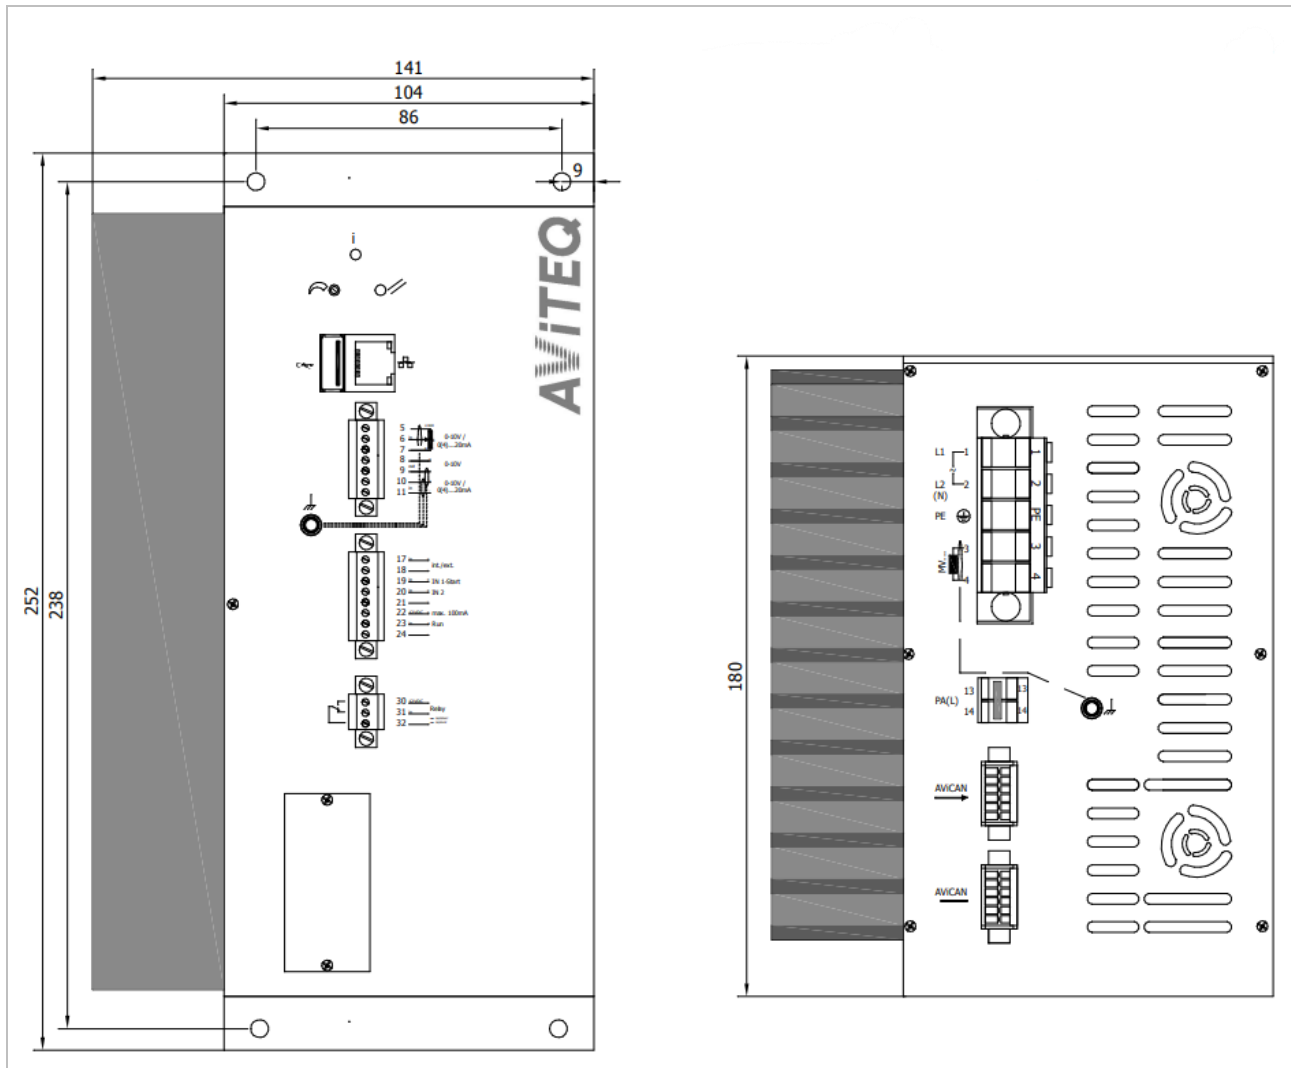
Dimensions SDE50/...-2 – left front view – right bottom view
